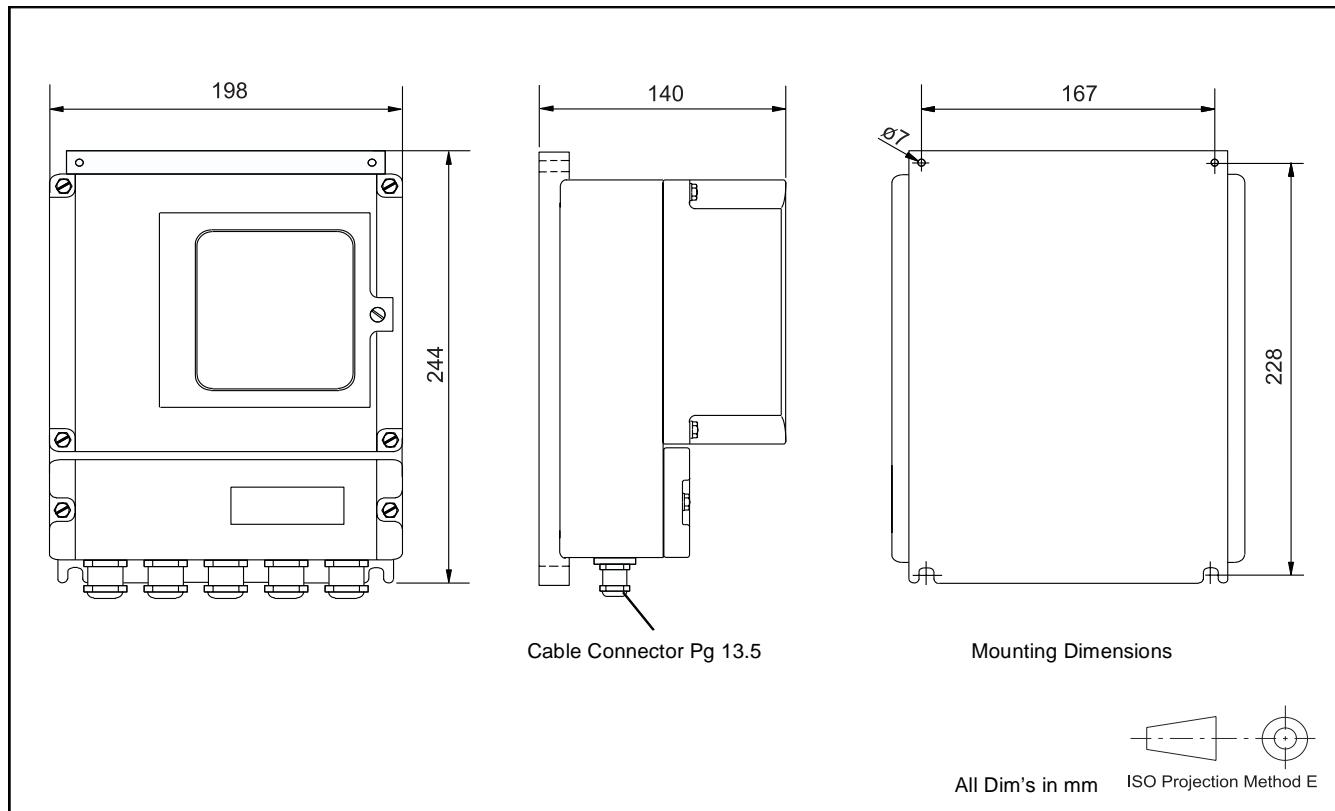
Dimensions Converter Field Mount Enclosure with Window
